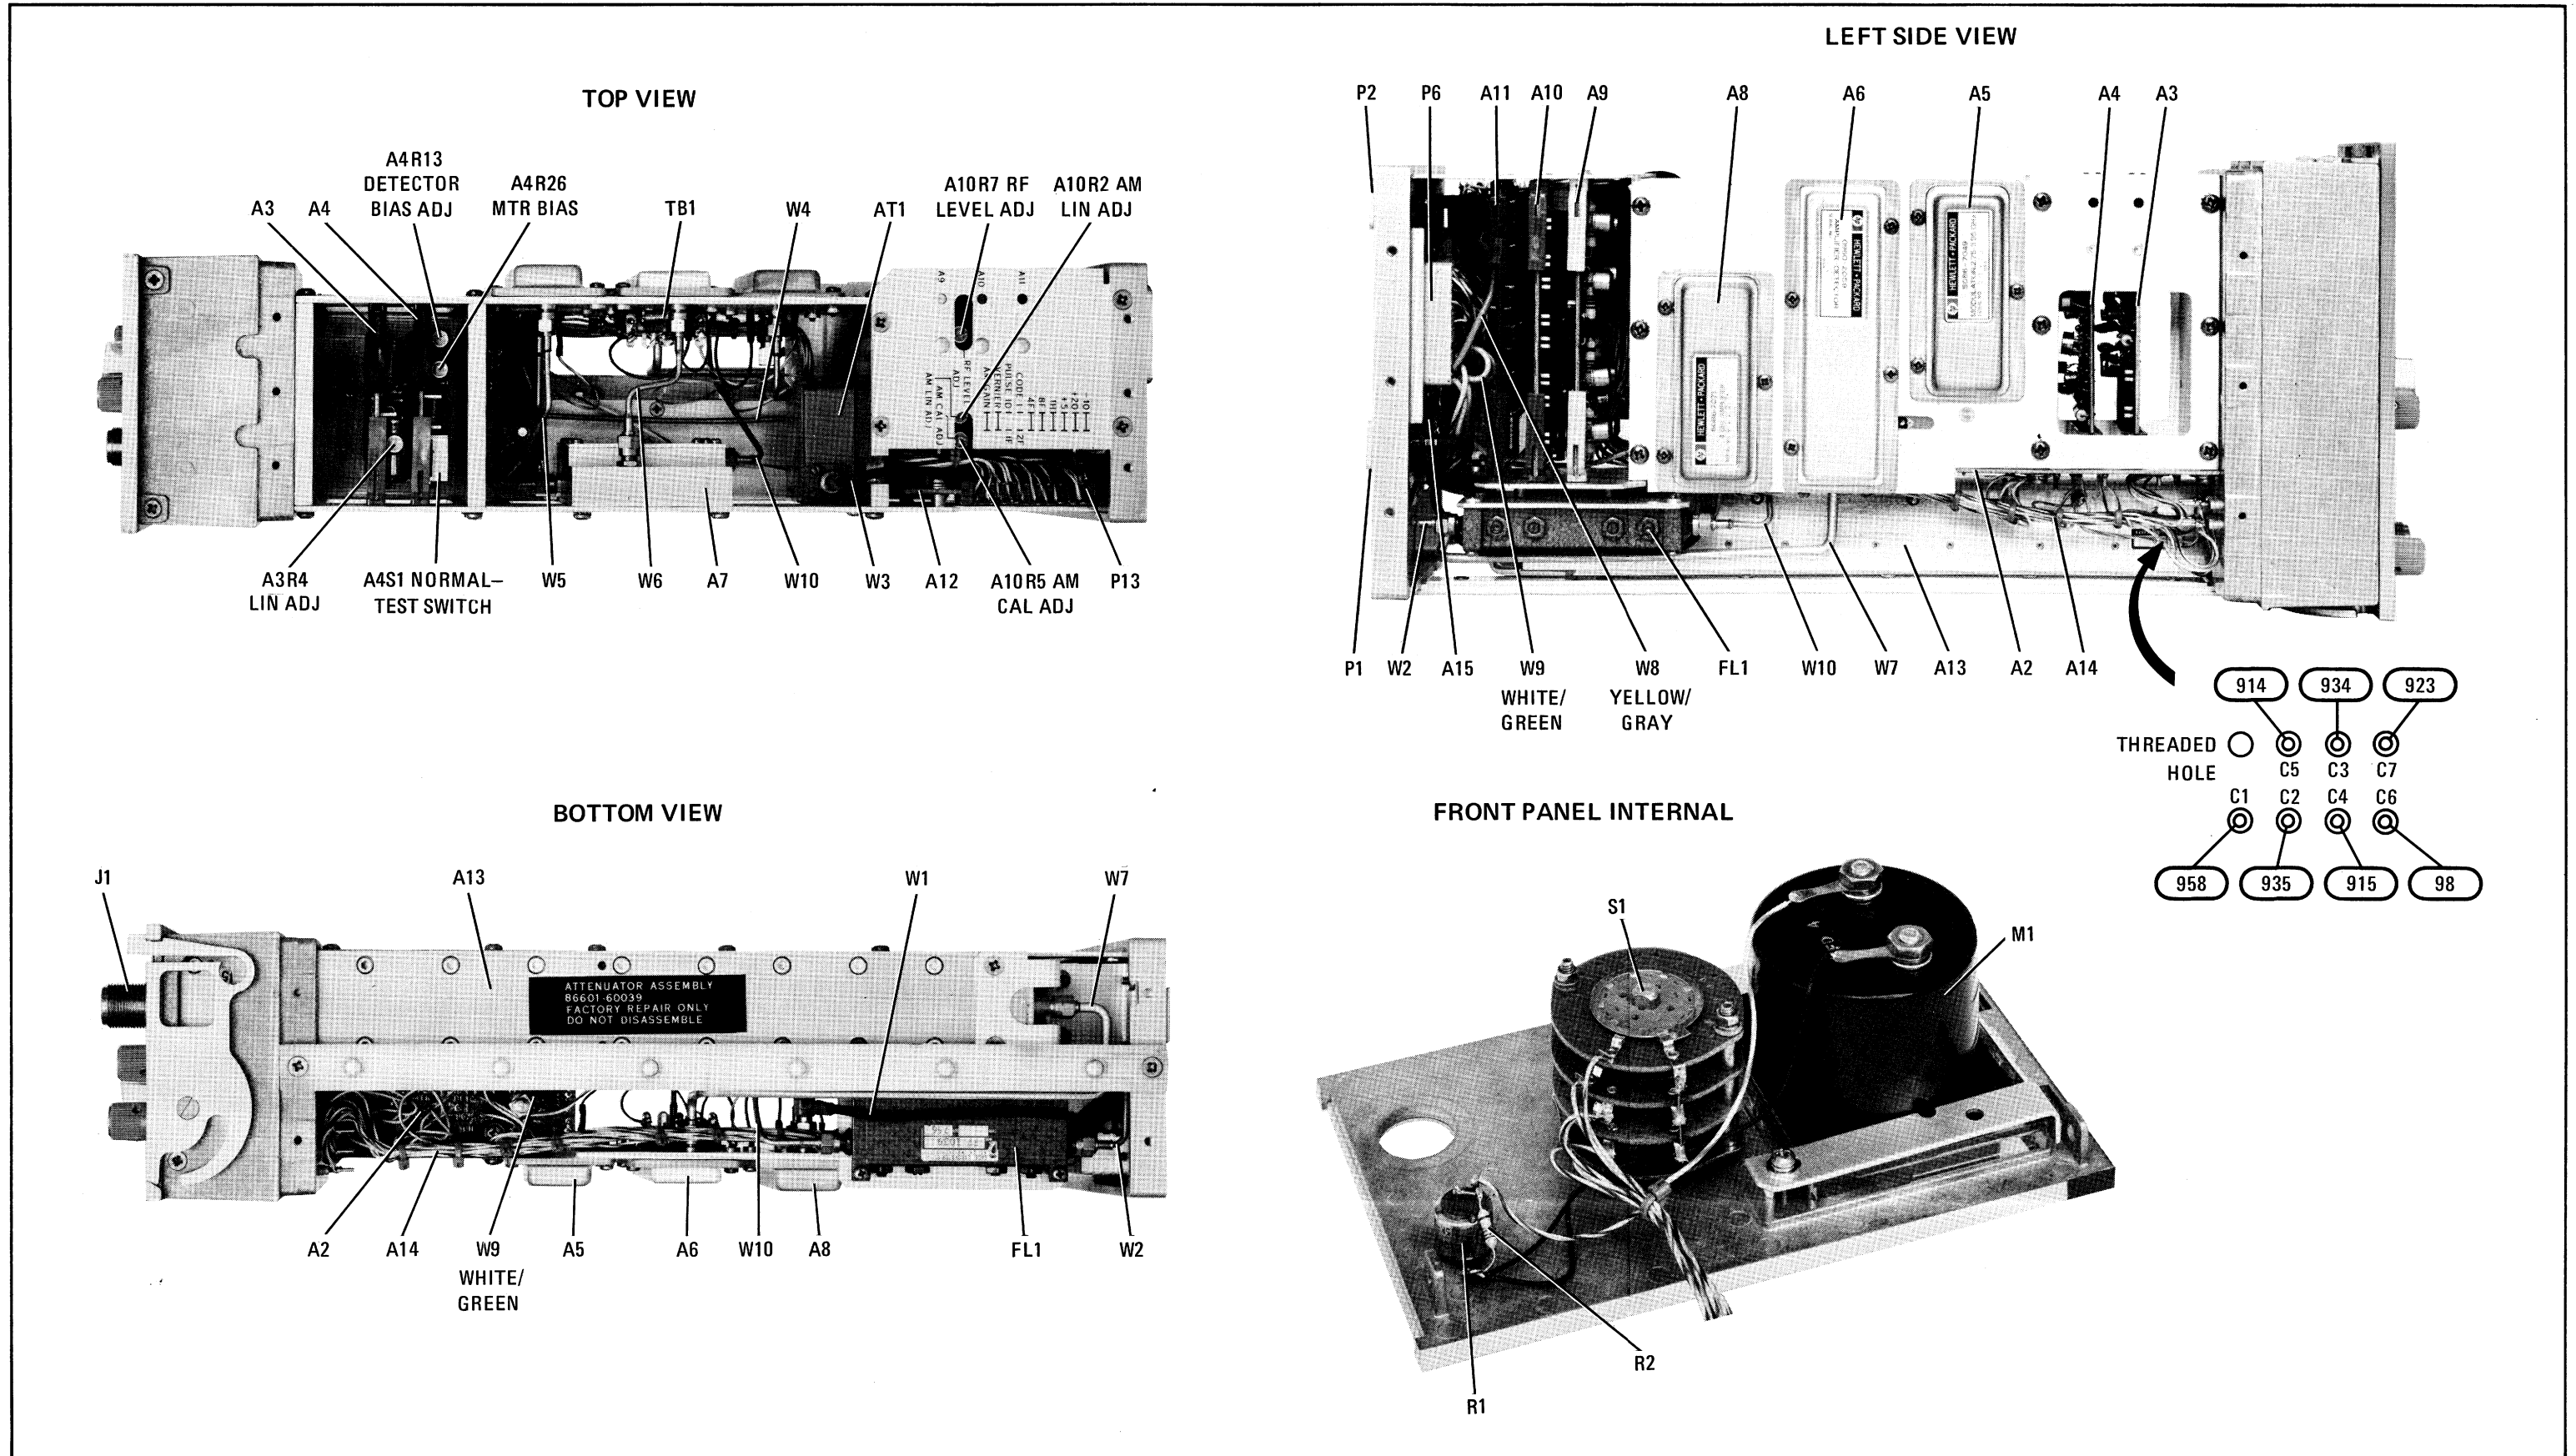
Assemblies, Chassis Mounted Parts, and Adjustable Component Locations
